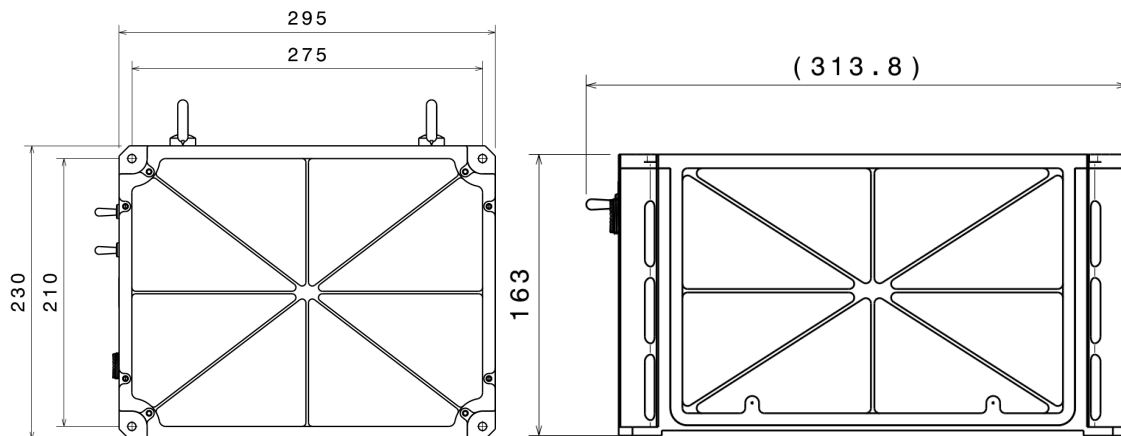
Left: THOR front view and dimensions. The fixation M6 hole are horizontally spaced by 275mm and vertically space by 210mm. Right: THOR bottom view and dimensions.
